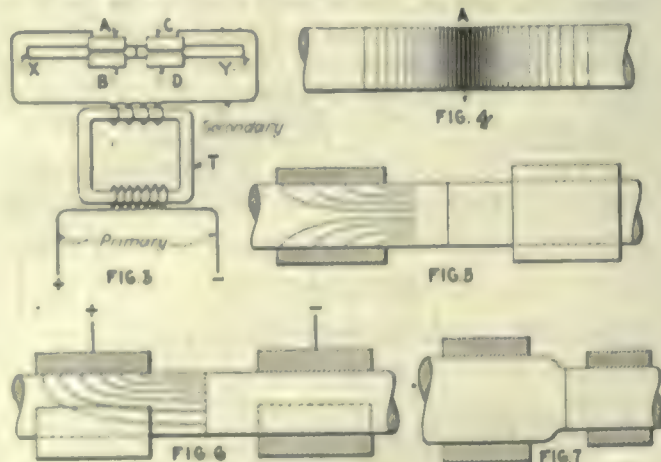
DIAGRAM OF THE ESSENTIAL ELEMENTS OF A RESISTANCE WELDING MACHINE. FIG. 4—DIAGRAM SHOWING JOINT DISTRIBUTION OF HEAT WHEN TWO PIECES ARE BROUGHT TOGETHER IN WELDING MACHINE. FIG. 5—DIAGRAM SHOWING PATH OF CURRENT WHEN PIECES ARE SURROUNDED BY DIES. FIG. 6—DIAGRAM SHOWING UNEQUAL RESISTANCE WITH ONE FLAT AND ONE CURVED DIE. FIG. 7—TWO PIECES OF UNEQUAL DIAMETERS HELD IN WELDING MACHINE.
